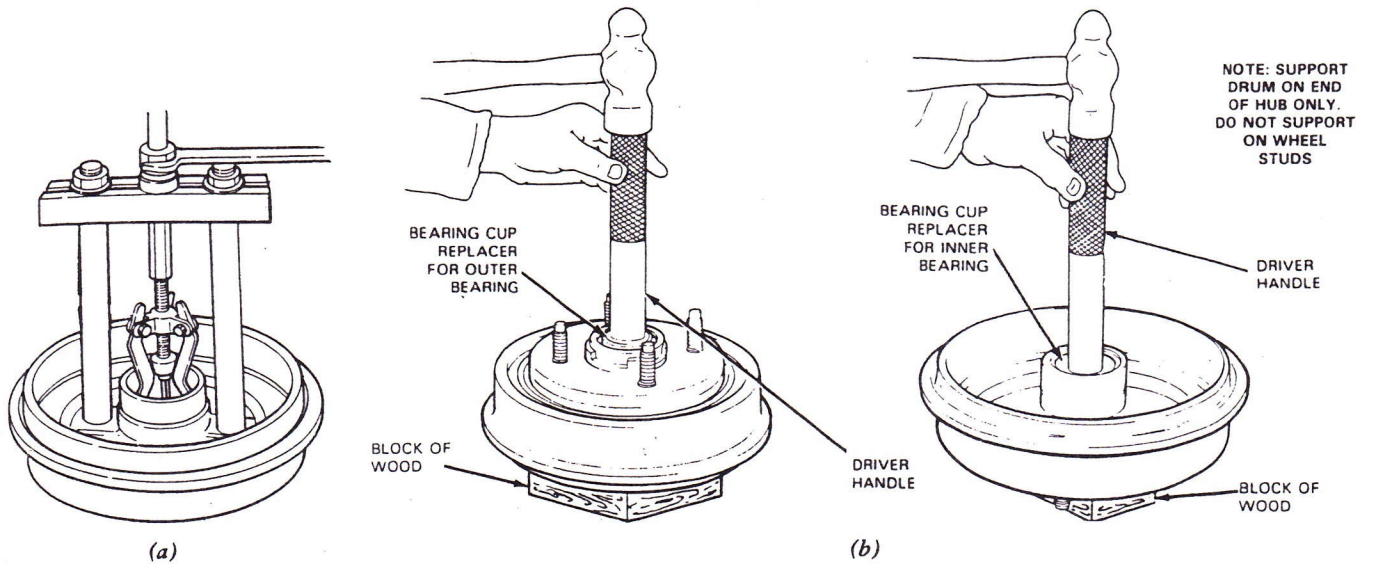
Replacing Front Wheel Bearing Cups. (a) Removing cups; (b) installing cups. (Courtesy of Ford Motor Company)
